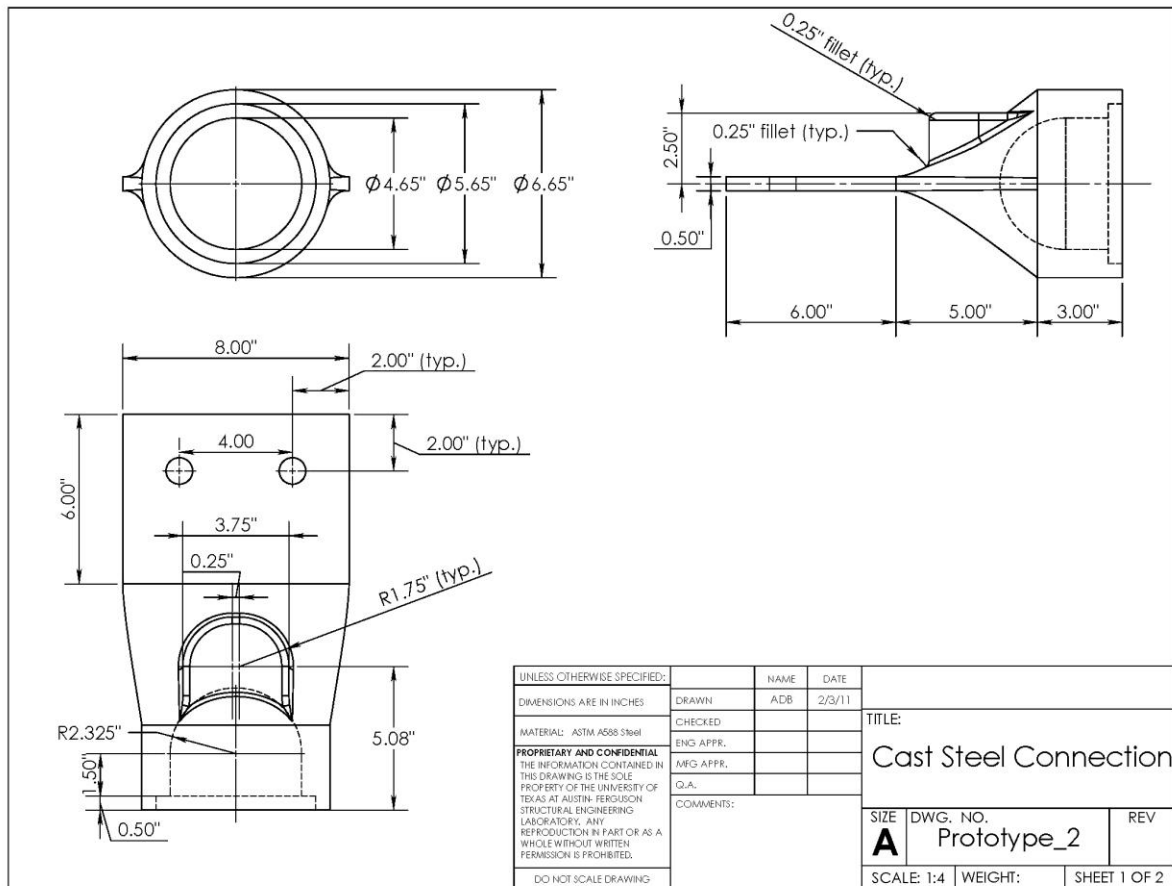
Two Dimensional Drawing of Cast Steel Connection
